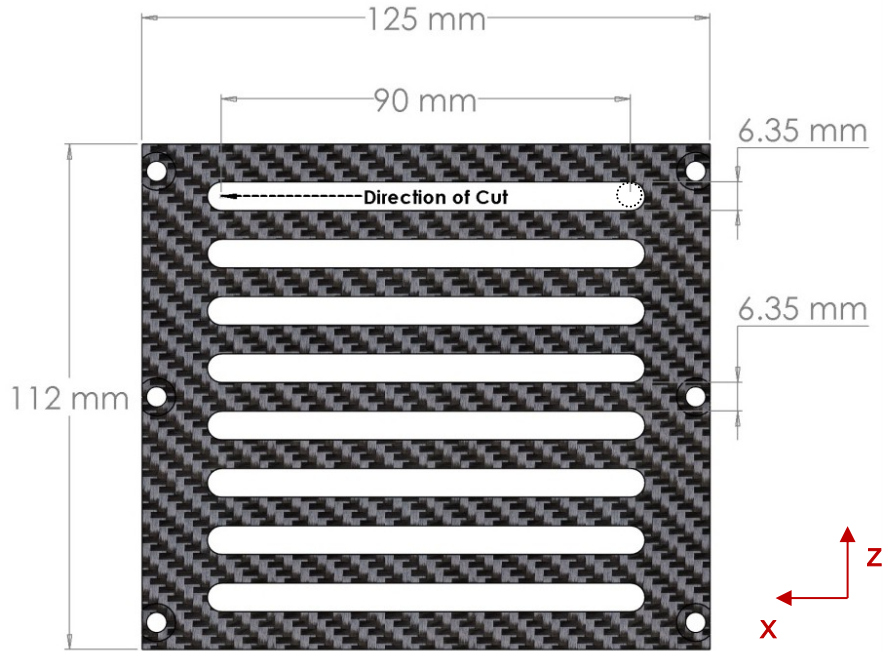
Front view of workpiece layout showing a sample pilot hole (dotted)
